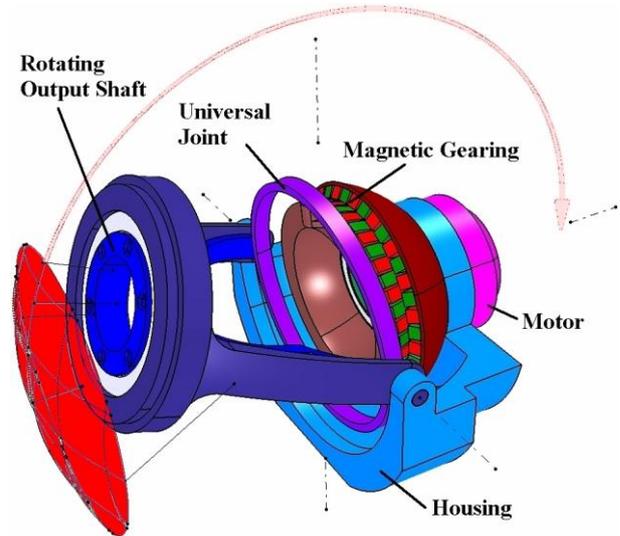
Magnetic Gearing Actuator with Deflected Output Shaft, Mode2 (Working Position).
